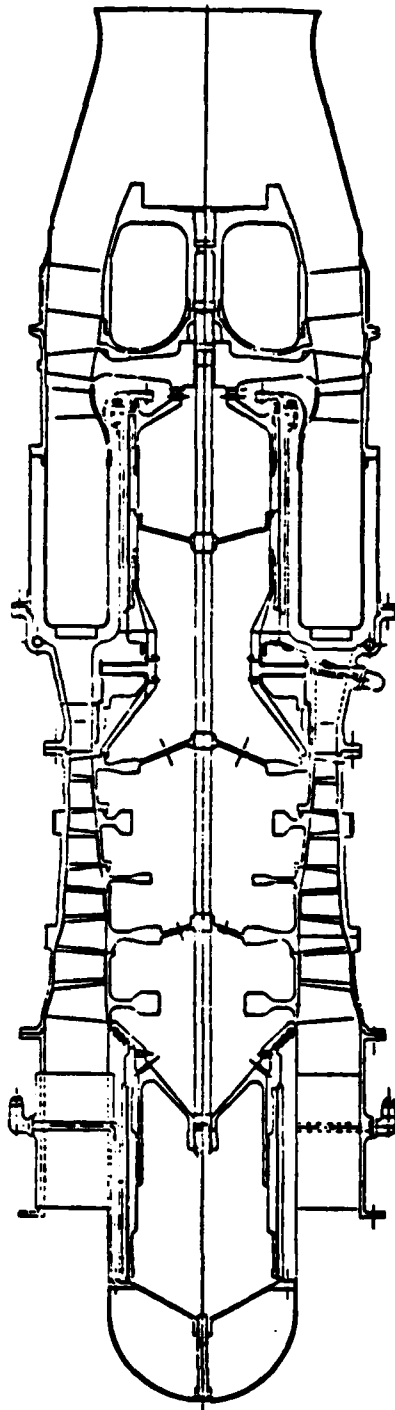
TJE331-1029 Thrust Engine 4.5-Inch Diameter Journal.
